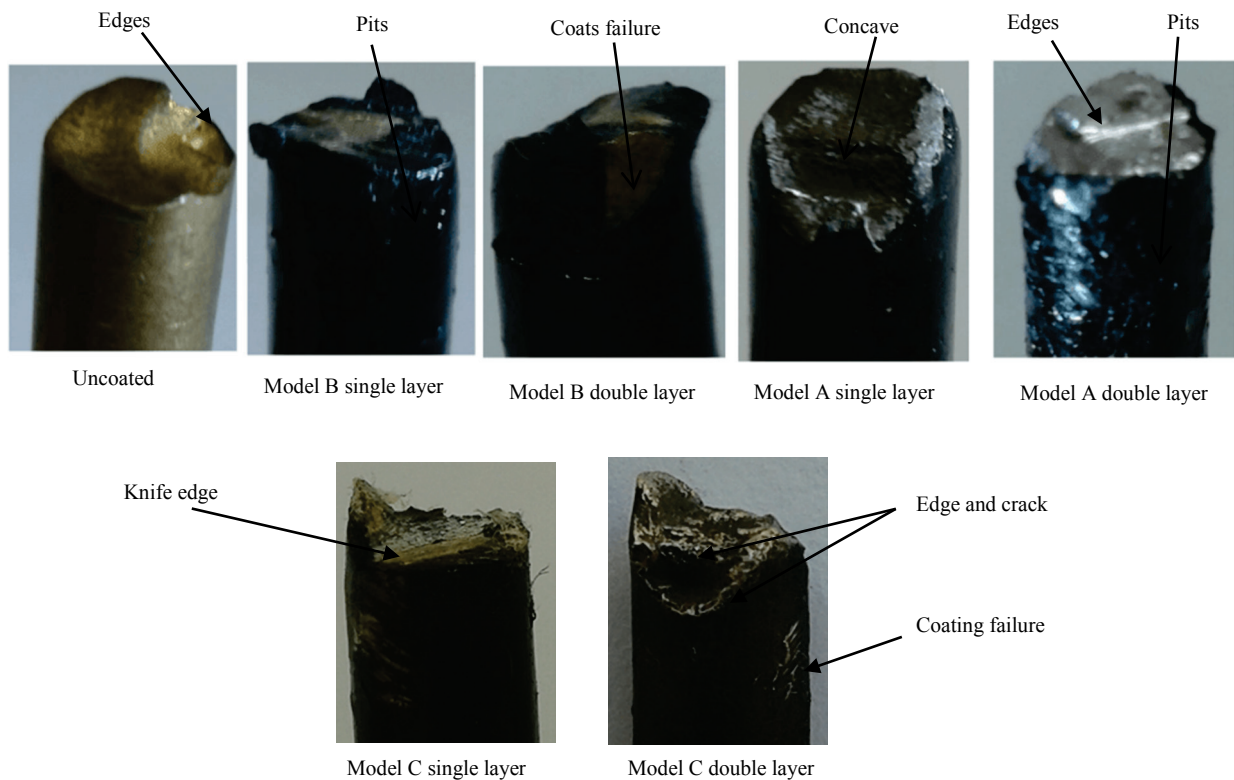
Fracture surface of specimens after test in the Zubair crude oil.
